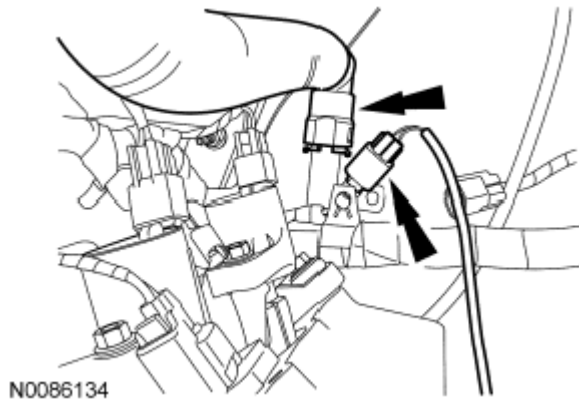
Locating RH Knock Sensor Electrical Connector And Heater Coolant Hose
